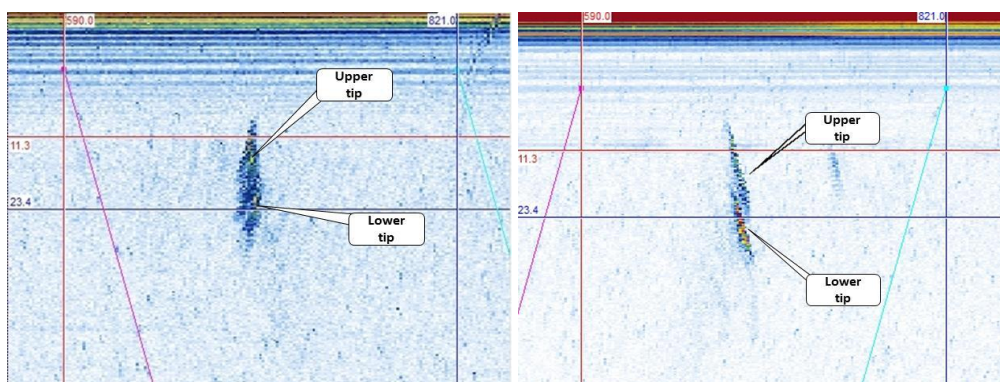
Typical ultrasonic echo from flaw produced by aid piece simulating thermal fatigue defect
